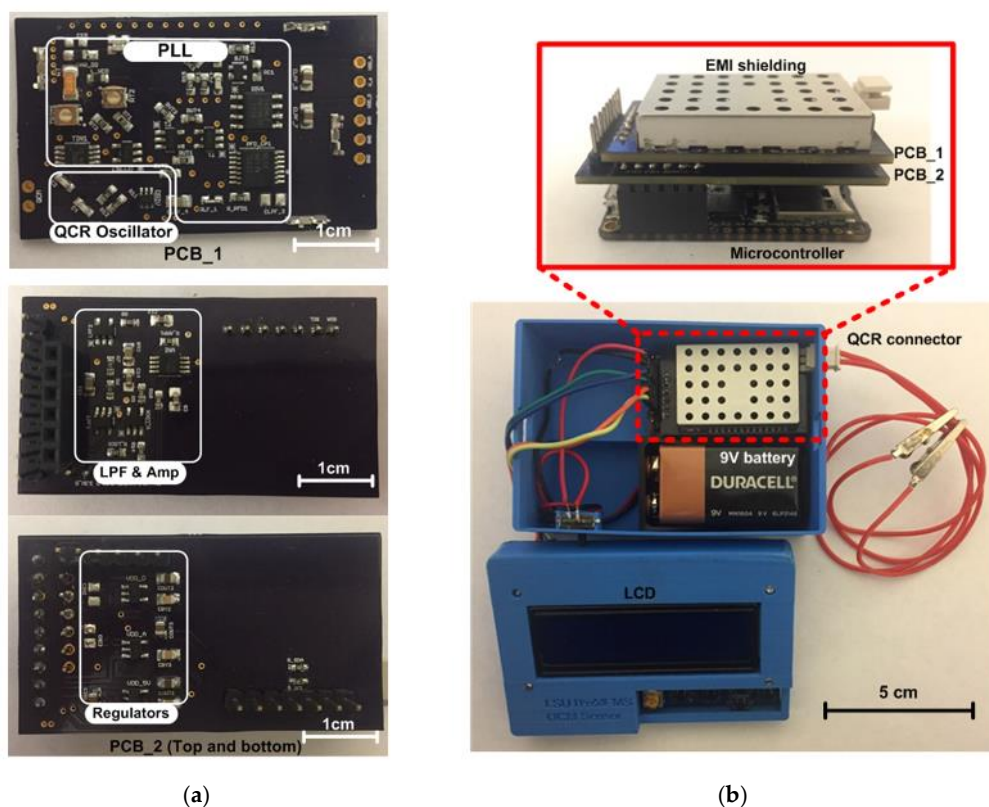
Developed miniaturized QCM measurement system including custom-designed PCBs: (a) designed PCBs (PCB_1 and PCB_2) and (b) developed system inside a 3-D printed housing.
